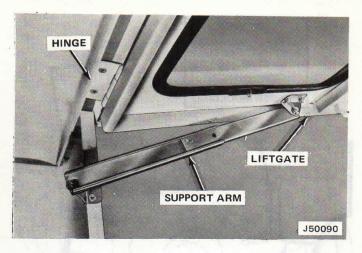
Liftgate Hinges and Support Arms Installed
